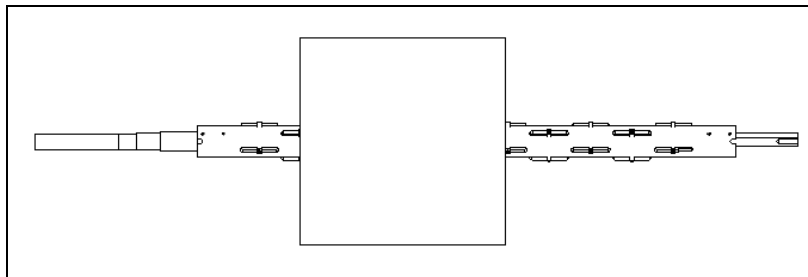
One Reel Mounted on the Shaft. Do not keep the Gripping Area open.
